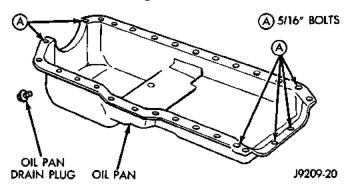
Position of 5/16 inch Oil Pan Bolts
